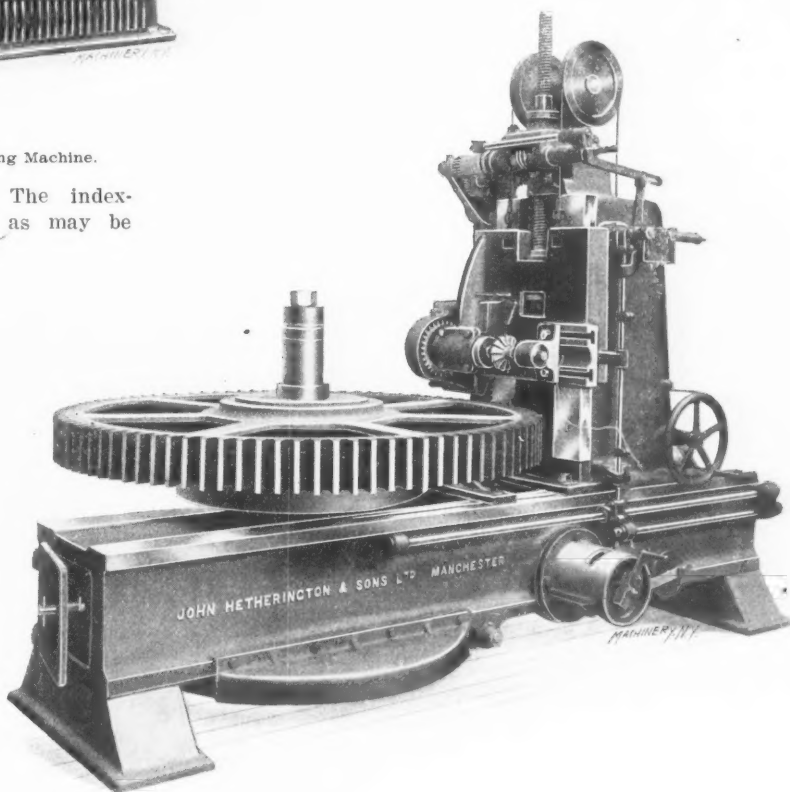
The Hetherington Automatic Gear-cutting Machine.
